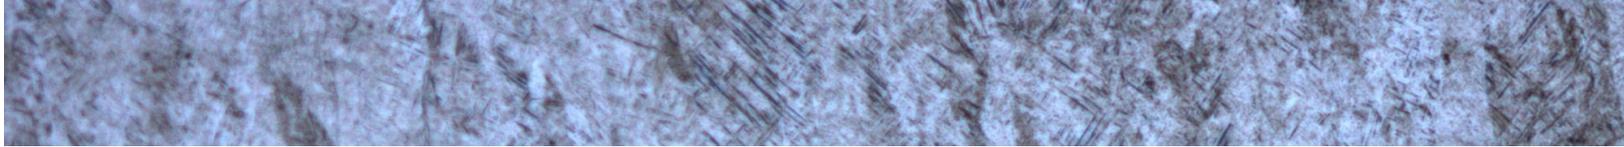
SR Longitudinal test piece with defects (FL3). Macro same features as Figure 33	42
